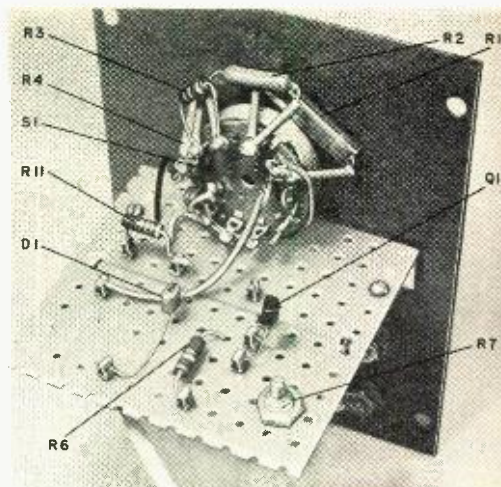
Inside top view of converter shows voltage divider resistors mounted on the range-selector switch. "Breadboard" type construction can be used to hold the other components in place. A phenolic perforated board and small clips were used here.
